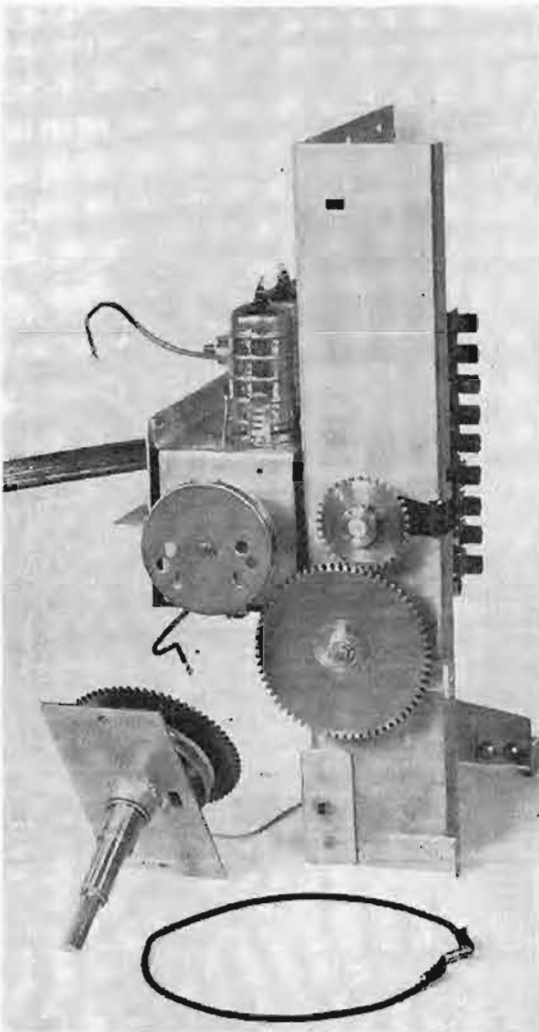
(above): Photo of tuner removed from the chassis showing gear drive mechanism
